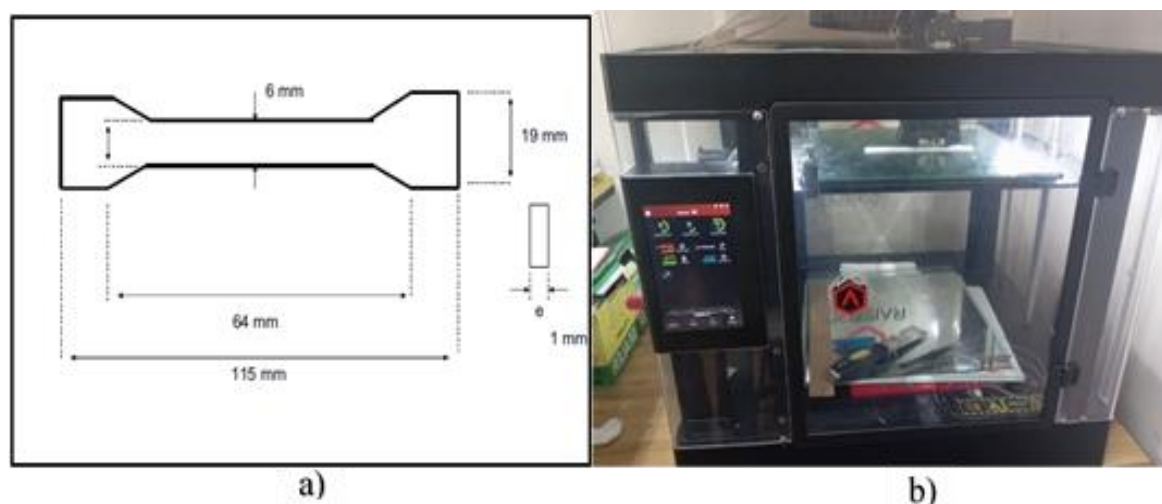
(a)Standard tensile testing specimen (ASTM D638), (b)The 3D printer machine RAISE 3D.
